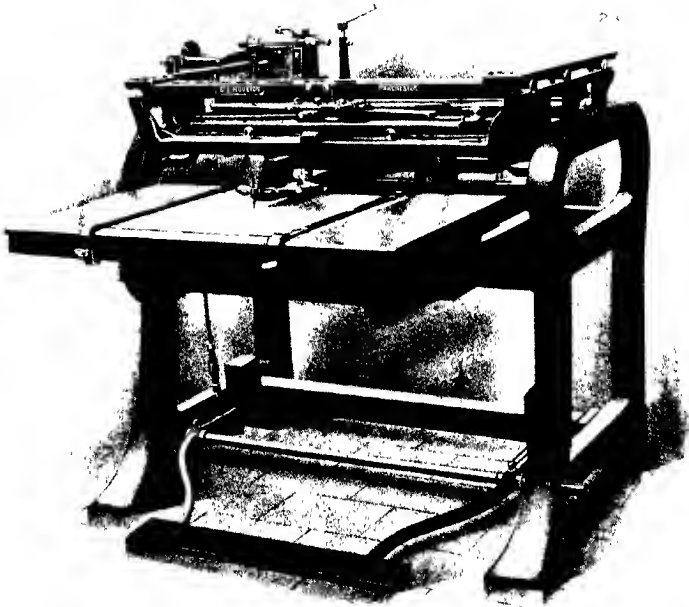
Die Pentagraph Flat Table Machine (Shields' principle)
